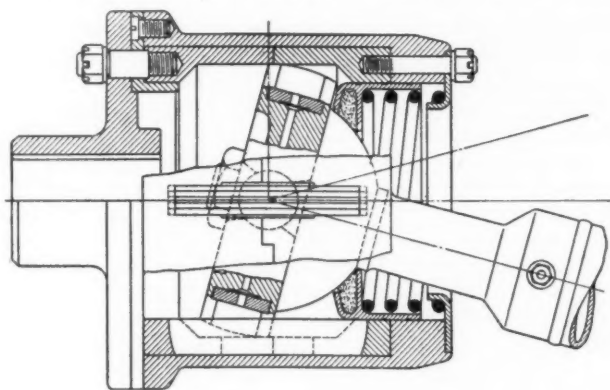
STANDAGE BEAM-TYPE RESILIENT UNIVERSAL JOINT
